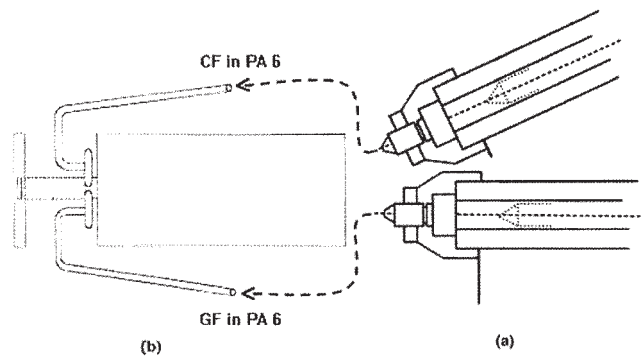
(a) Coinjection molding nozzle section. (b) Mold cavity.
